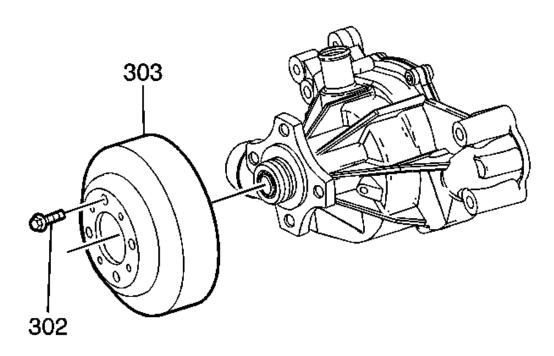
View Of Water Pump Pulley & Bolts Courtesy of GENERAL MOTORS CORP.
